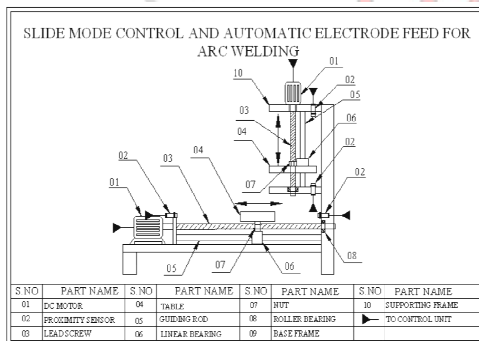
First drawing of slide mode control and automatic electrode feed for arc welding
